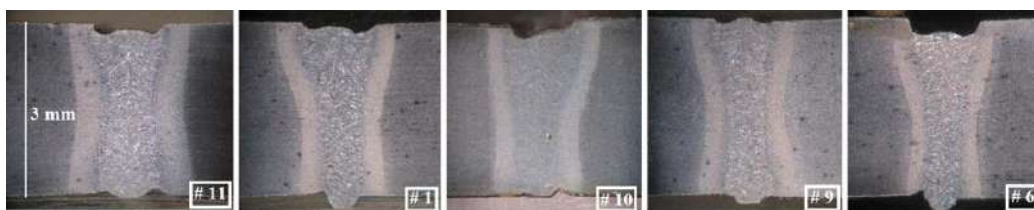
Cross sections of the welded samples with complete penetration.
